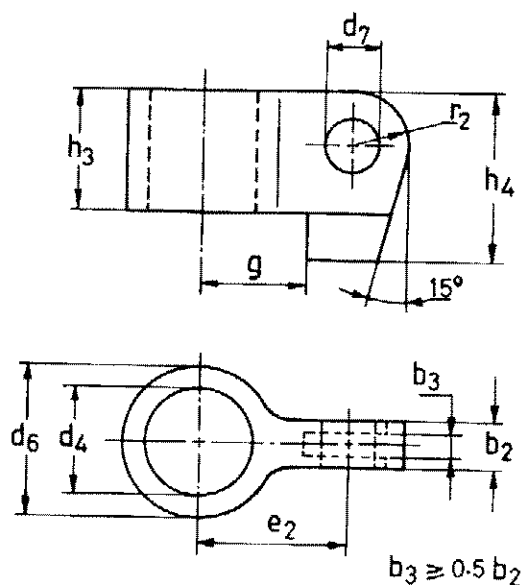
SHAPE OF LEAD BLOCK HOLDER, FORM F
